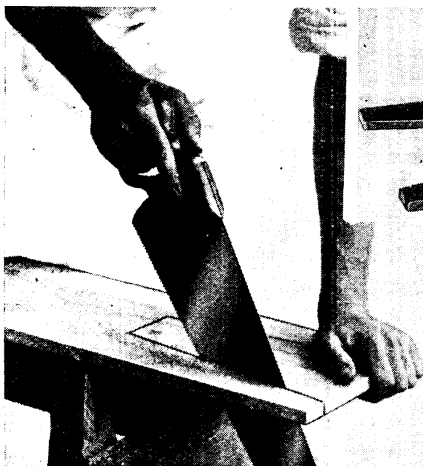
Side pieces are cut out first and the legs made by sawing out a blunt V-shaped piece of the material. Fig. 36 (top, right). Legs for the cabinet may here be seen more clearly. A complete side is shown with the outside uppermost. Fig. 37. Grooves are sawn for the shelves, as illustrated. One groove is completed, one is sawn but not chiselled out, and one is being sawn
